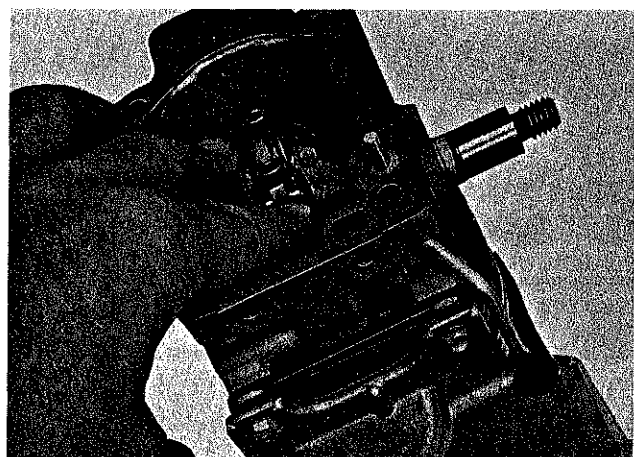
Check the joint line between connecting rod and cap. This "finger nail" test will show whether the cap has been installed properly. It should not be possible to detect the joint line between connecting rod and cap when the screws are tight.
